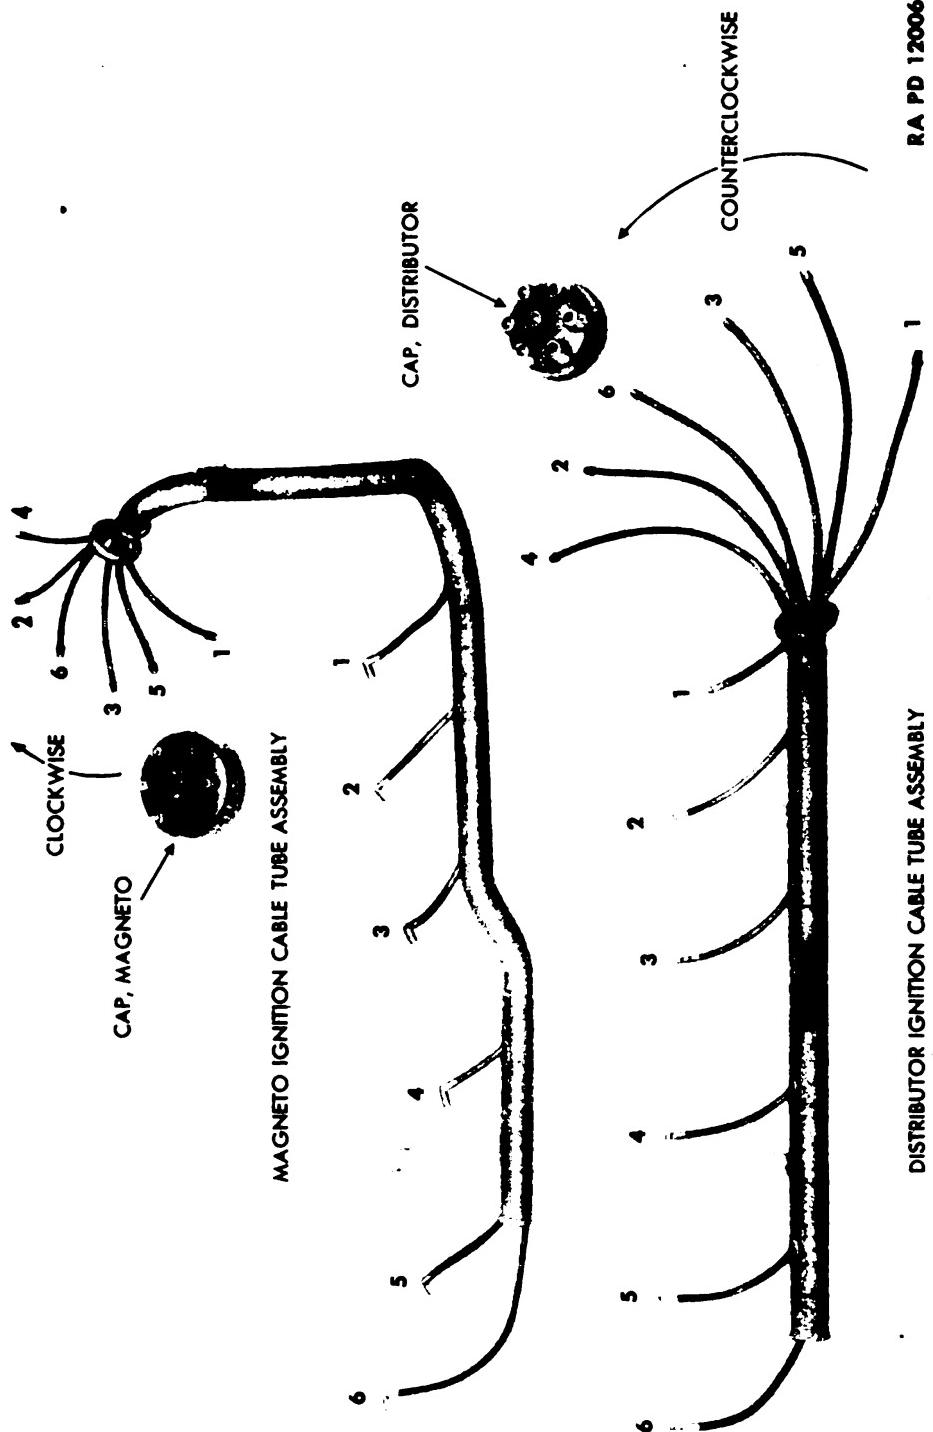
Assembly of Magneto and Distributor Ignition Wires and Cable Tubes
